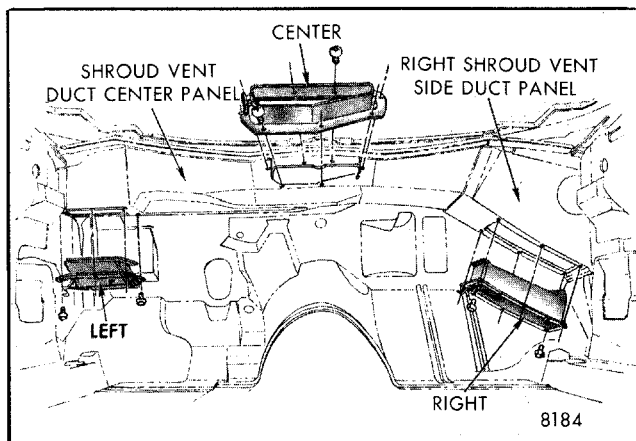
Air Duct Outlet Locations - "A and E" Styles
